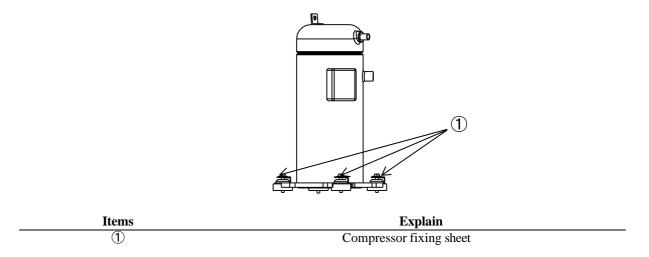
Compressor Fixed Sheet Metal Removal Schematic
